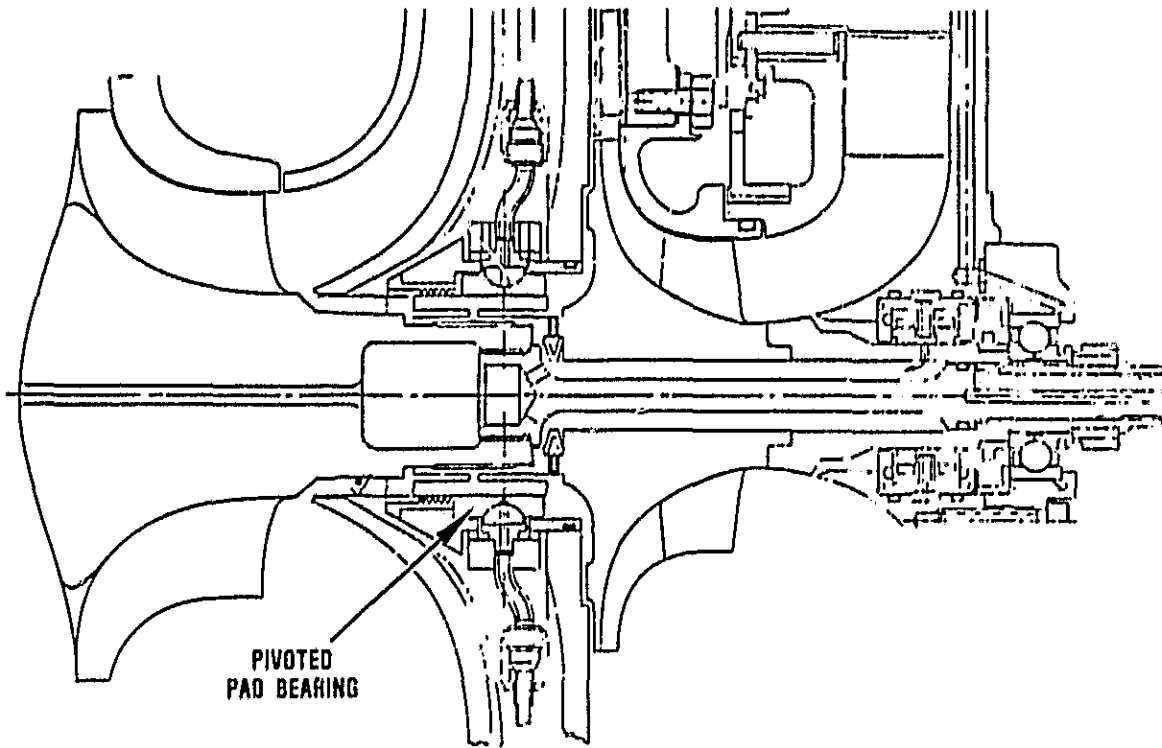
Pivoted Pad Air Bearing Installed in Engine.
